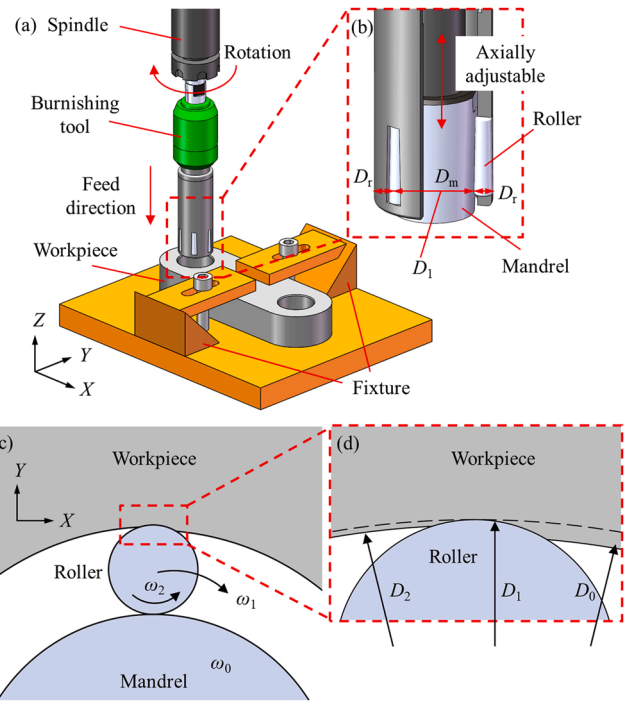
Schematic diagram of (a) hole burnishing system, (b) details of burnishing tool, (c) 2D simplified model of burnishing tool, and (d) contact area.
